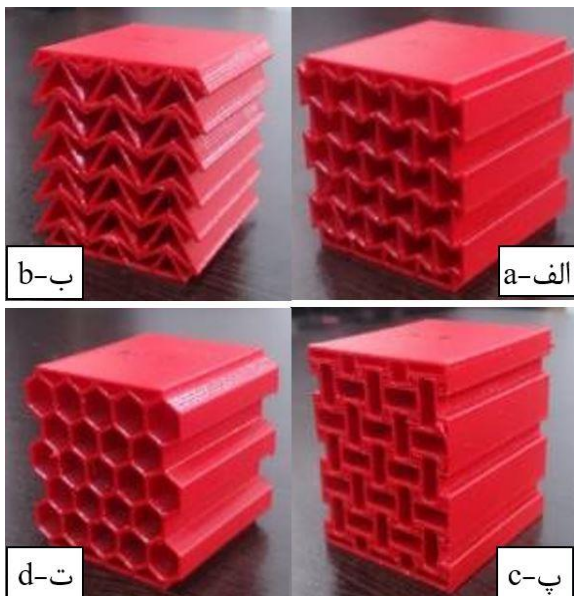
final printed specimens: a- reentrant, b- arrowhead, c- anti-tetra chiral, d- honeycomb
